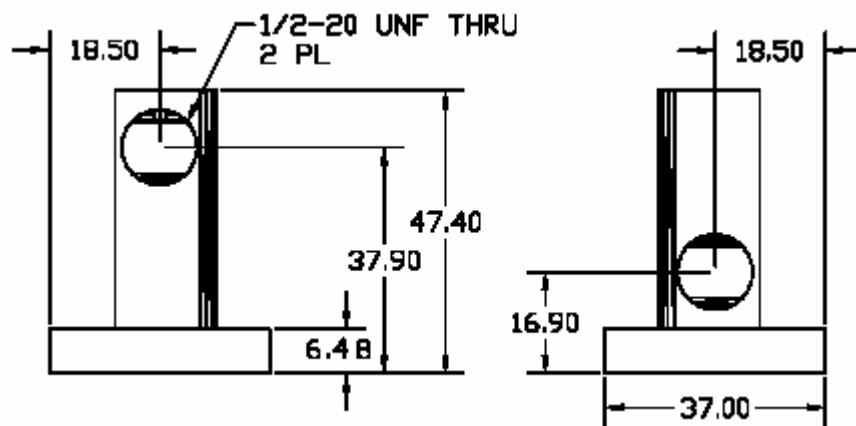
Inlet-side view (left) and outlet-side view (right) of the inner cartridge (AutoCAD 2006)
